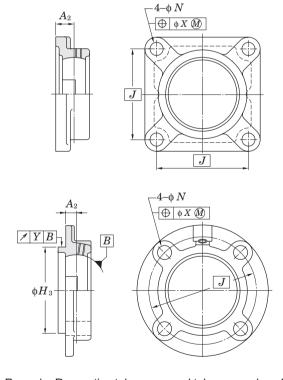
Dimensions relative to installation of housings with tolerances and tolerance values (representative example)
